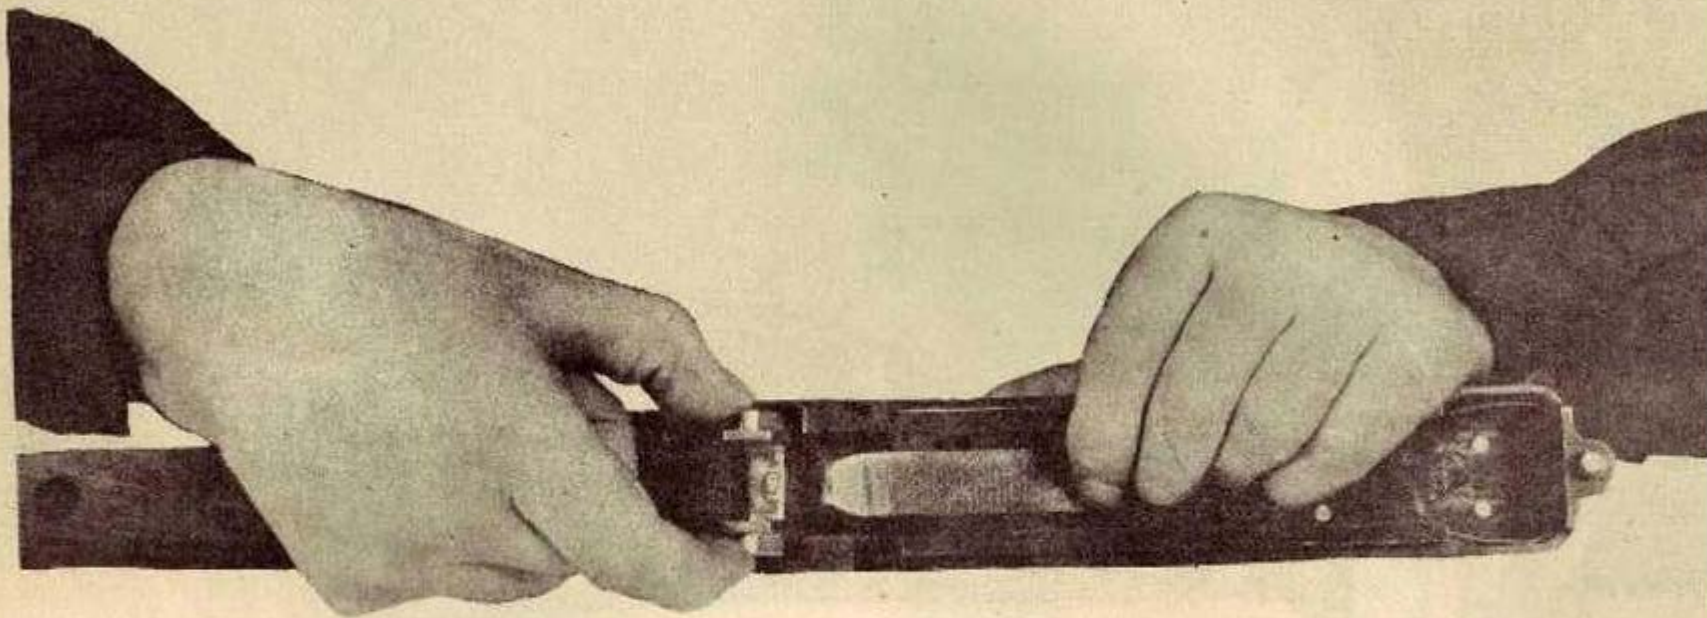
Slide ACTUATOR and LOCK forward in RECEIVER and lift BRONZE LOCK out thru the LOCK GROOVES.
